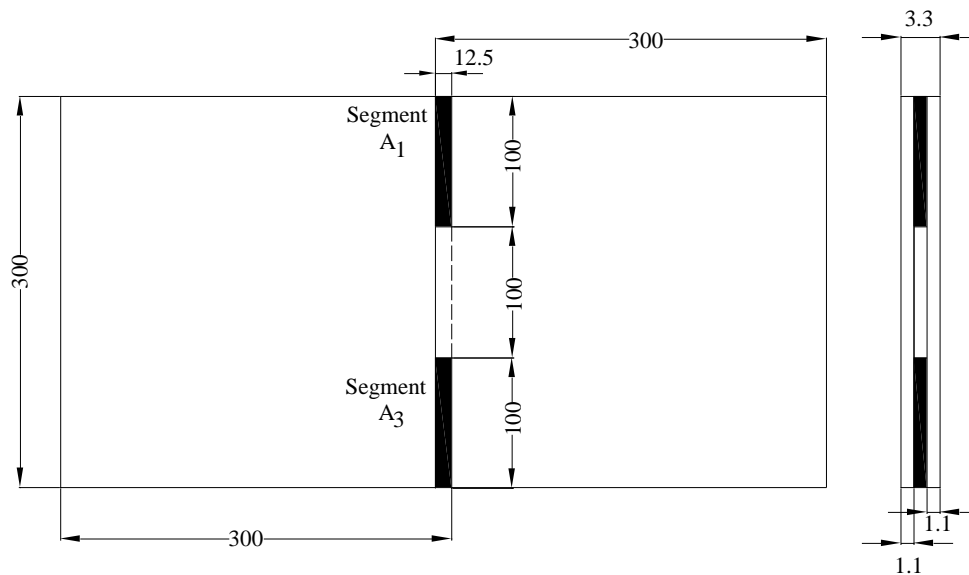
Geometric dimensions of plates with an adhesive lap joint (Case-2)
